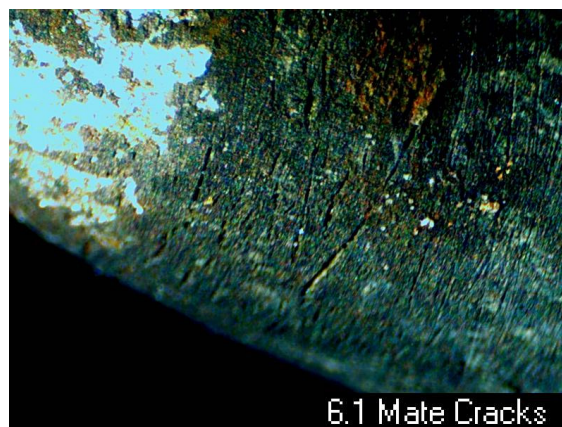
Visual inspection of test specimen 6 – side view.
